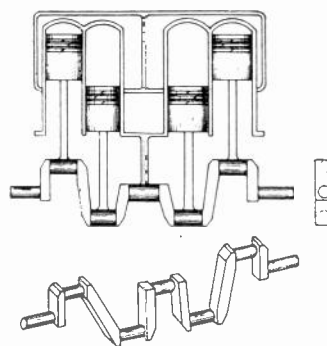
Sketch showing the design of the crank shaft and arrangement of pistons in a four-cylinder engine.
